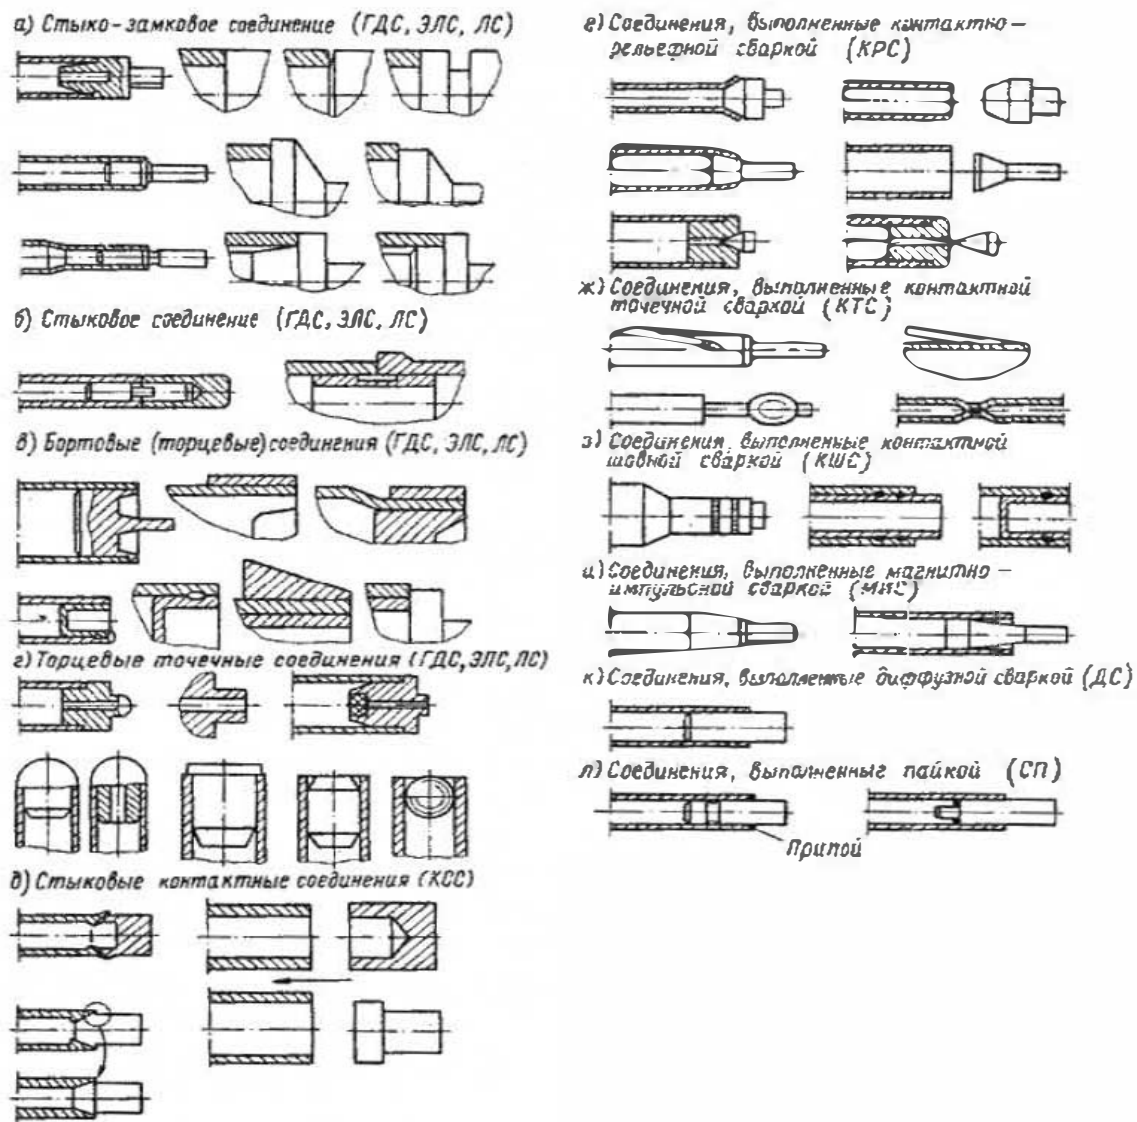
(a) (edge) butt-seam joint (*GAW, EBW, LW*), (b) butt joint (*GAW, EBW, LW*), (c) end-face joints (*GAW, EBW, LW*), (d) end-face spot joints (*GAW, EBW, LW*), (e) resistance butt welding joints (*RBW*), (f) resistance projection joints (*RBW*), (g) resistance spot welding joints (*RSW*), (h) resistance seam welding joints (*RSW*), (i) magnetic discharge welding joints (*MDW*), (j) diffusion welding joints (*DW*), (k) brazed joints.
